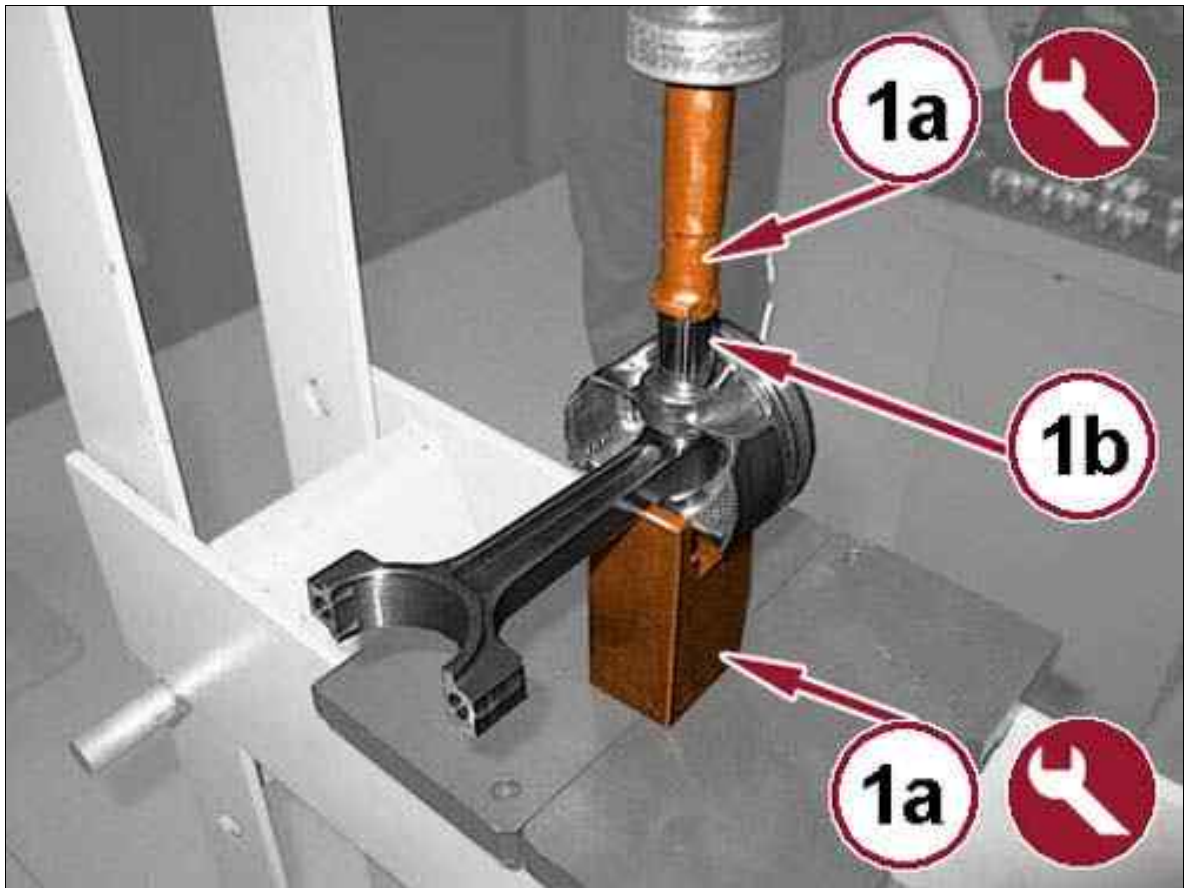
Joining Connecting Rod To Piston With Notch On Connecting Rod Positioned Next To Two Marks On Piston Crown For Intake Valves
